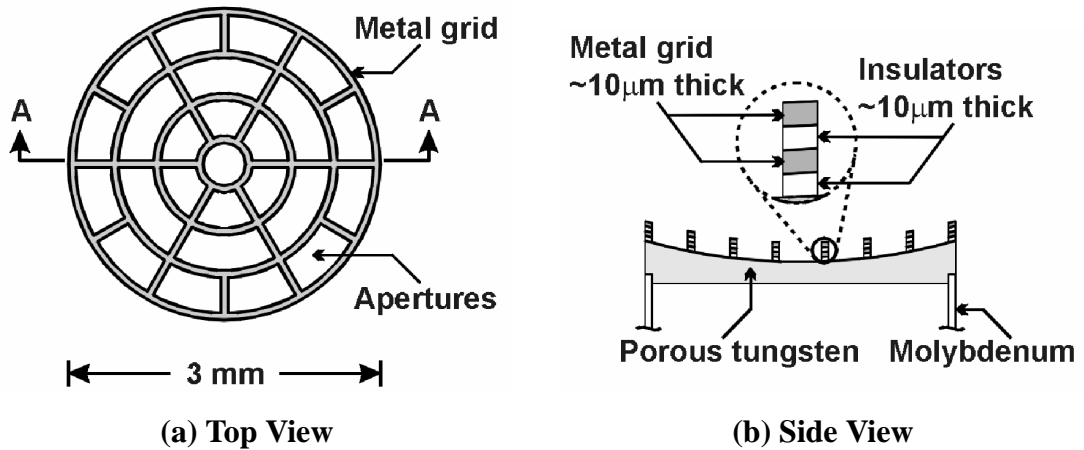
Dispenser cathode assembly to be fabricated using LCVD
